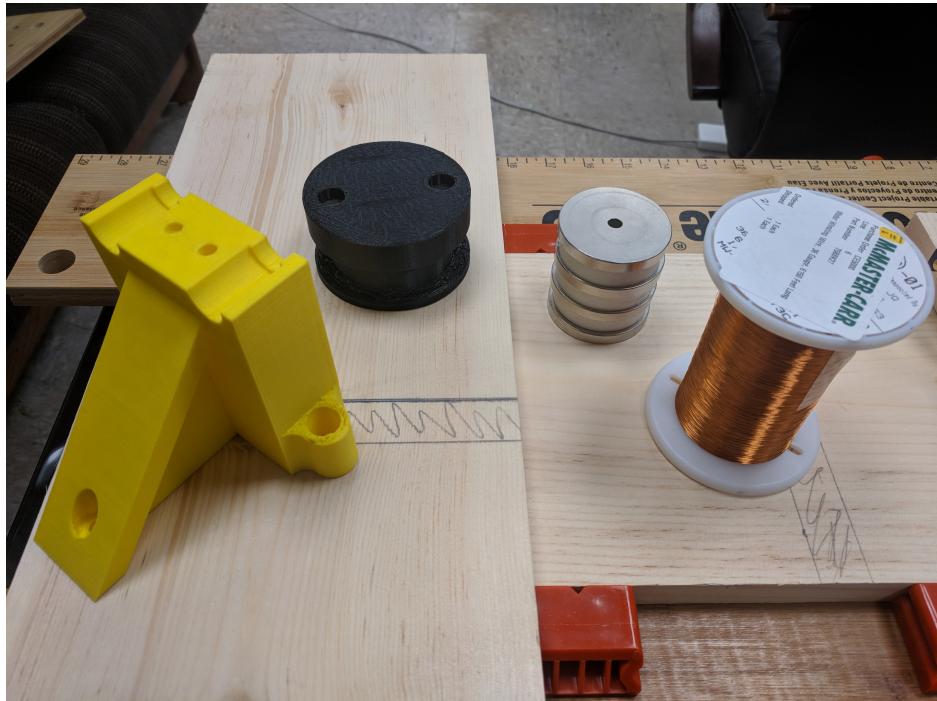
From left to right: 3D printed nylon sleeve bearing housing, 3D printed coil housing, set of 4 N42 magnets, 36AWG magnet wire.
